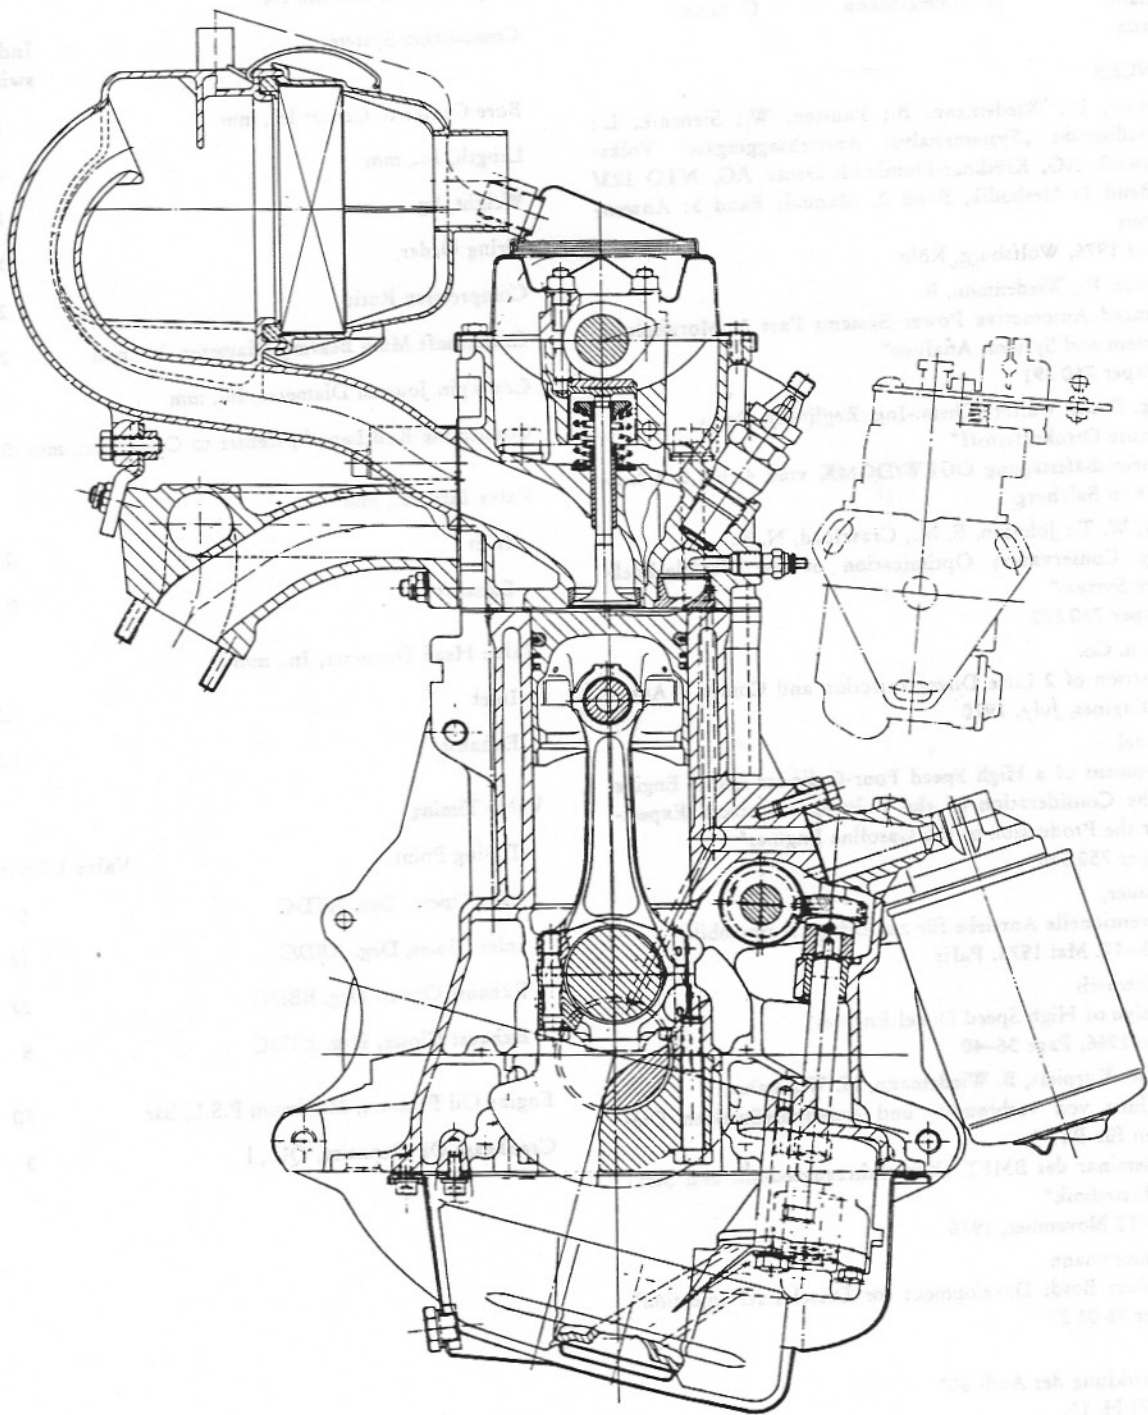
Main Cross-Sectional Views of the VW Diesel
